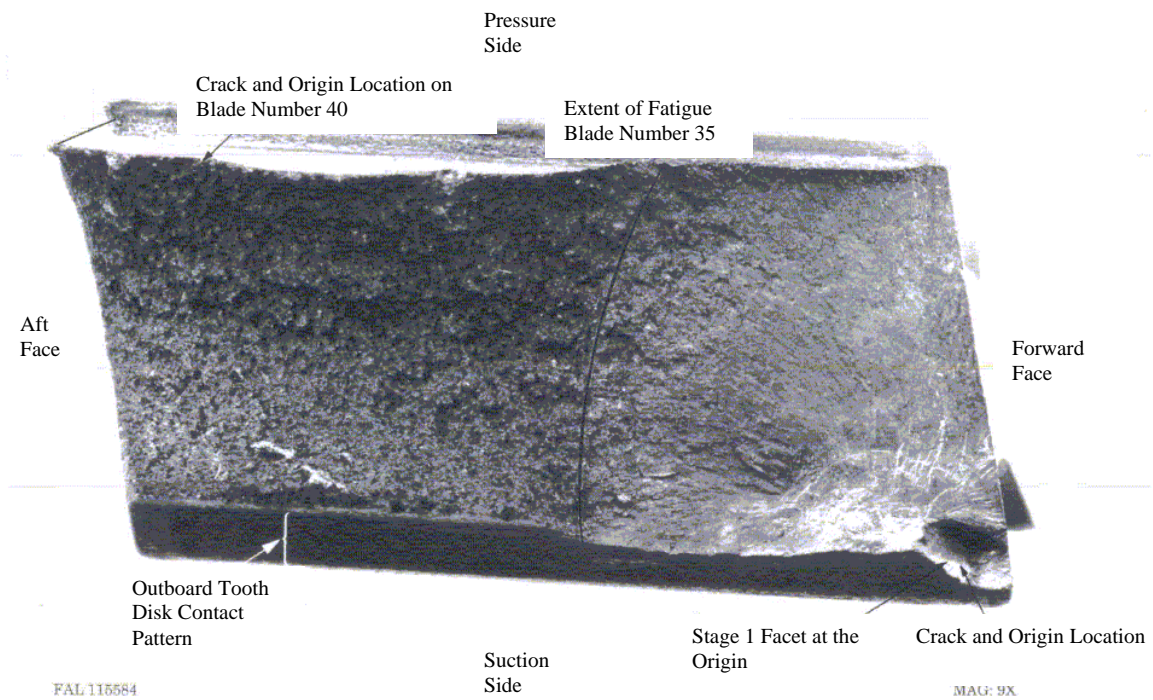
Top view of low pressure turbine blade upper tooth fracture surface
